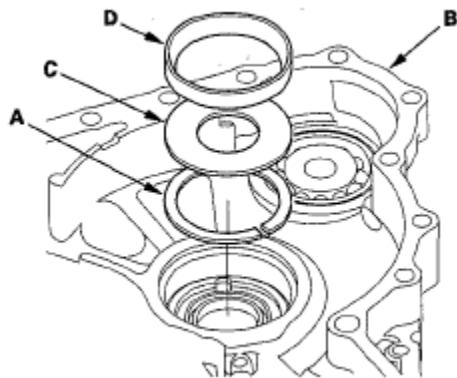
Identifying Spacer, Bearing Outer Race And Thrust Shim
